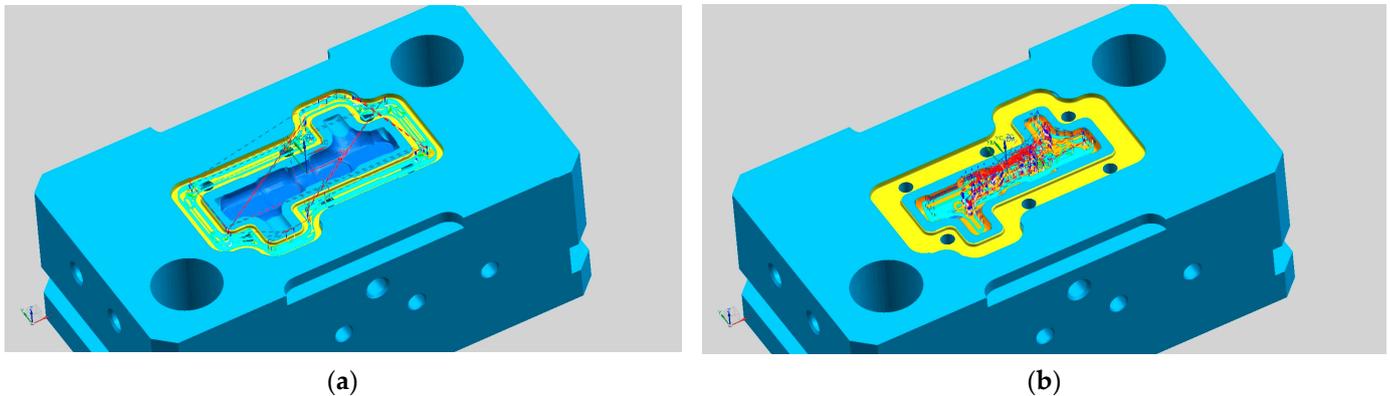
CNC finishing process: cavity rough and rounded edges milling, (a) cavity finishing (b).
